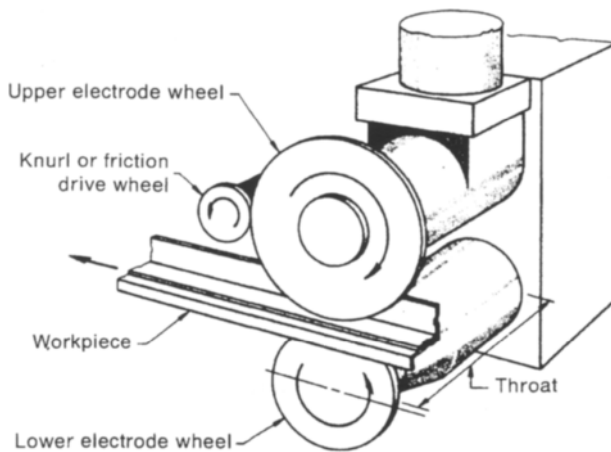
Equipment arrangement for seam welding. (Reprinted with permission from *ASM Metals Handbook, Desk Edition*, edited by H.E. Boyer and T.L. Gall (1985), ASM International, Materials Park, OH 44073-0002 (formerly American Society for Metals, Metals Park, OH 44073), p. 30.48, Fig. 6.)
